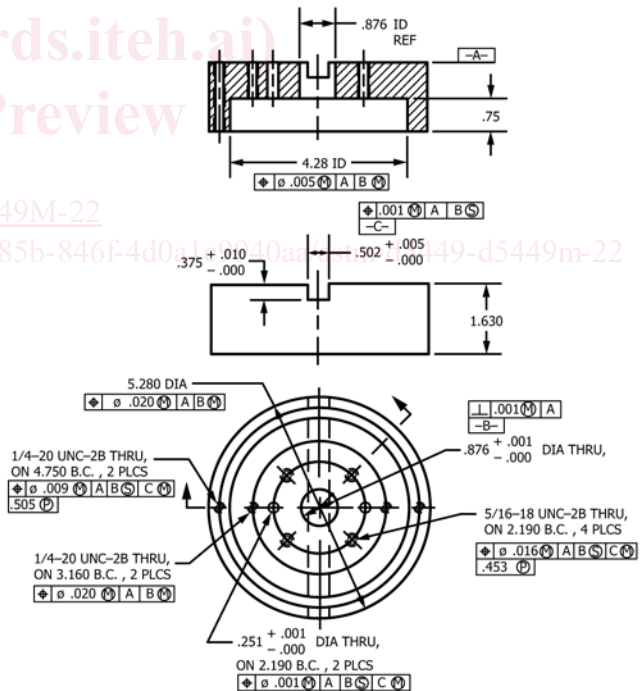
The Outer Shell of the Compression Fixture in English Units
